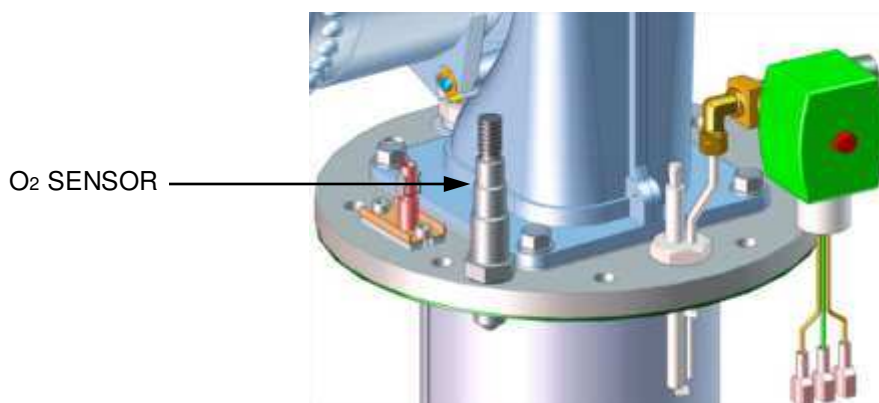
O₂ Sensor Mounting Location – BMK750 - 5000N (BMK750 shown)
